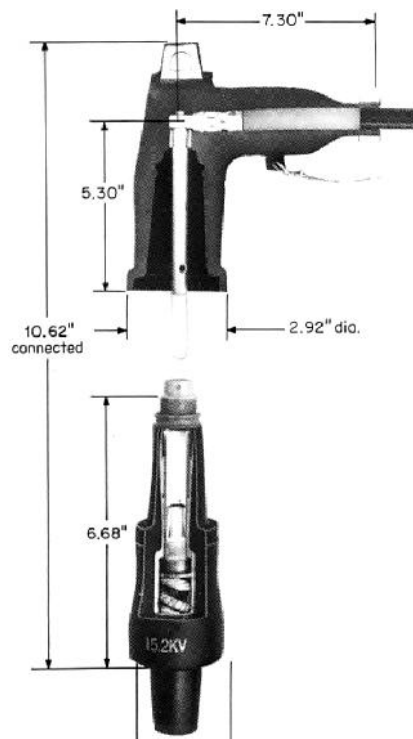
Cutaway view of elbow connector and switch module. (General Electric Company.)
